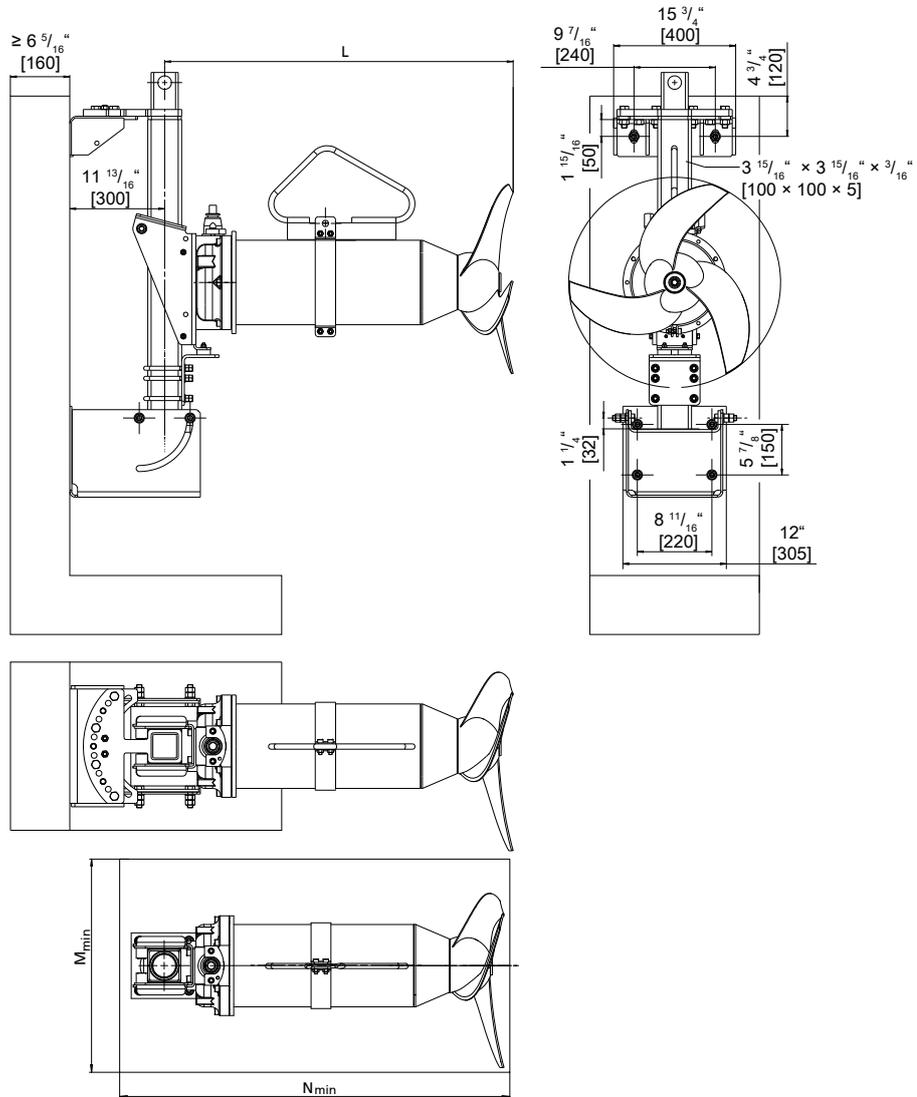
Installation of accessories 22 – Amamix 400 (size 4135 only) / 600
